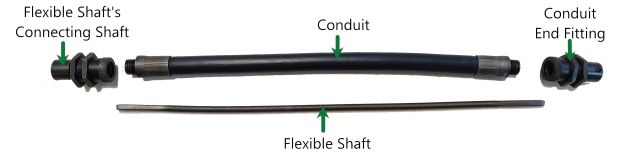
Flexible Shaft with Conduit and End Fittings.
